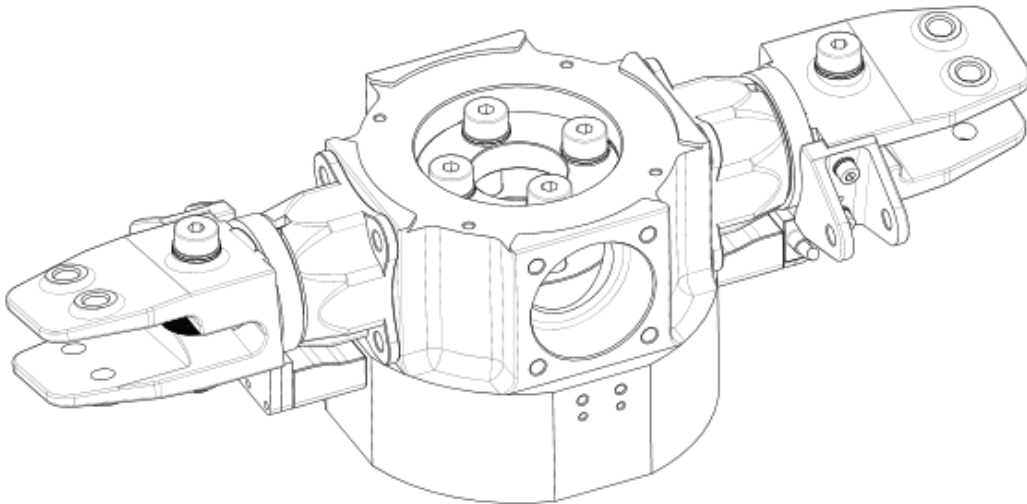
Rotor head with two MERIT blade attachments in isometric view [22]
